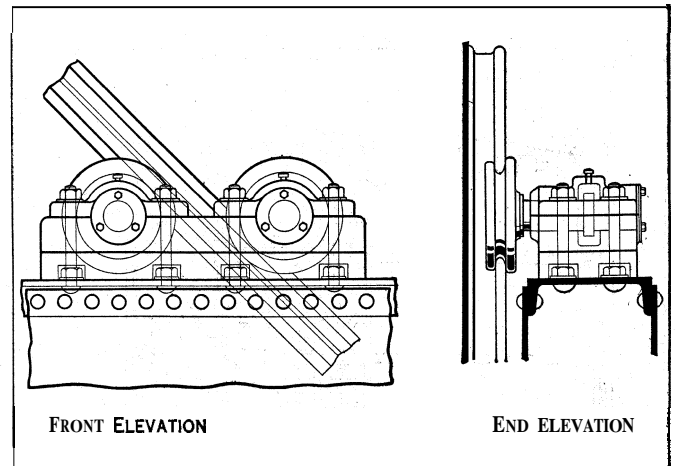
FRONT AND END ELEVATIONS OF SPIRAL GUIDE RUN BETWEEN SET OF ROLLERS
